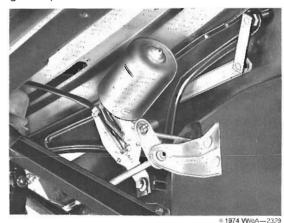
Wiper motor and frame in position under the dashboard. Pull the frame slightly to the rear to withdraw the wiper arm shafts from the front body panel.
